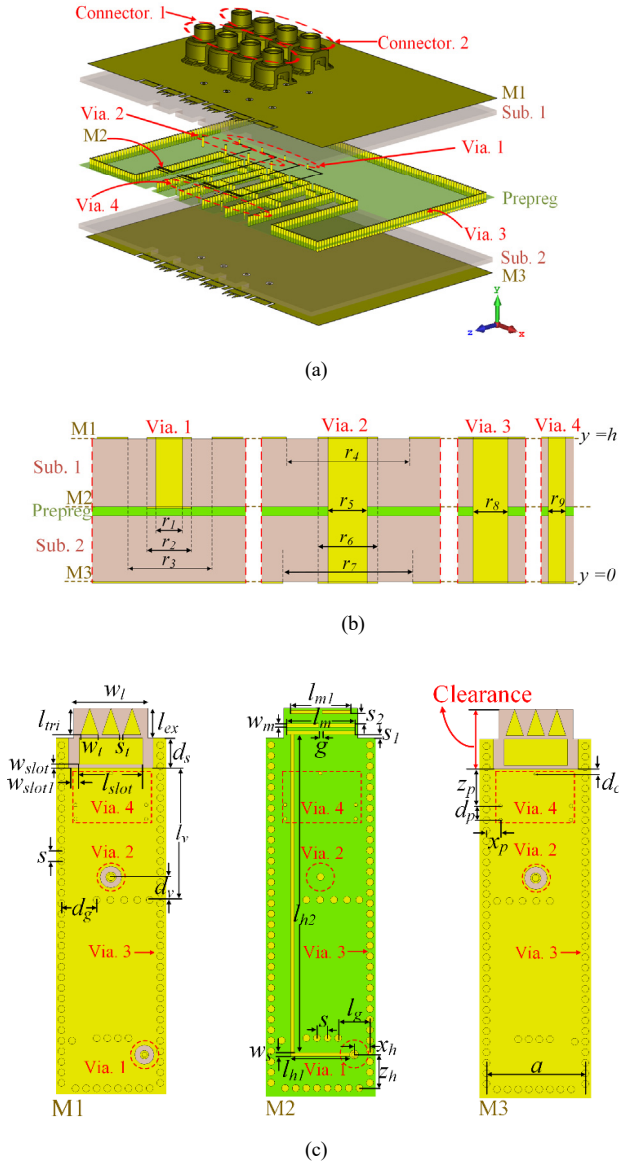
Antenna configuration: (a) Exploded view, (b) Side view, (c) Dimensions and layers.
